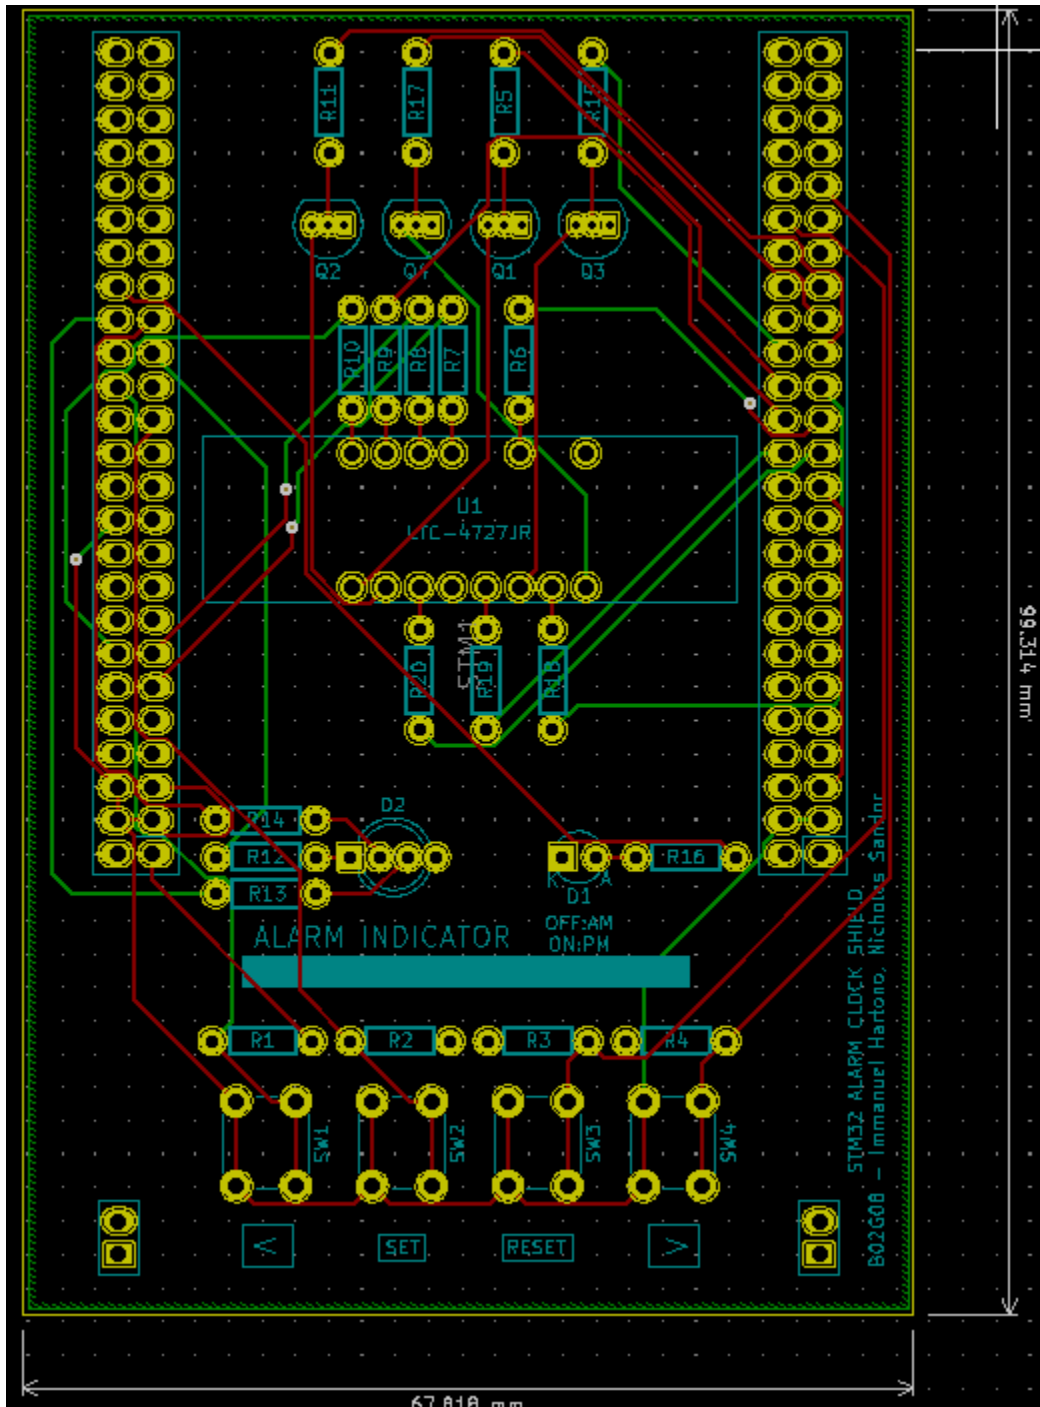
Final PCB layout with descriptive silkscreen and measurements shown
